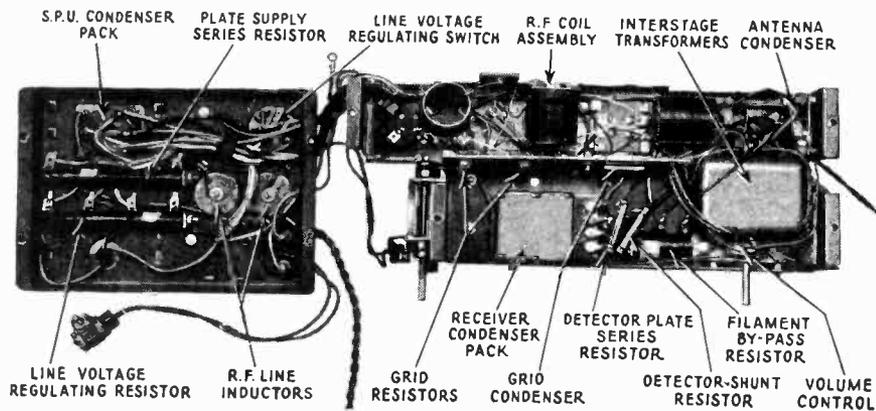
Sub-chassis view of receiver assembly and socket power unit
